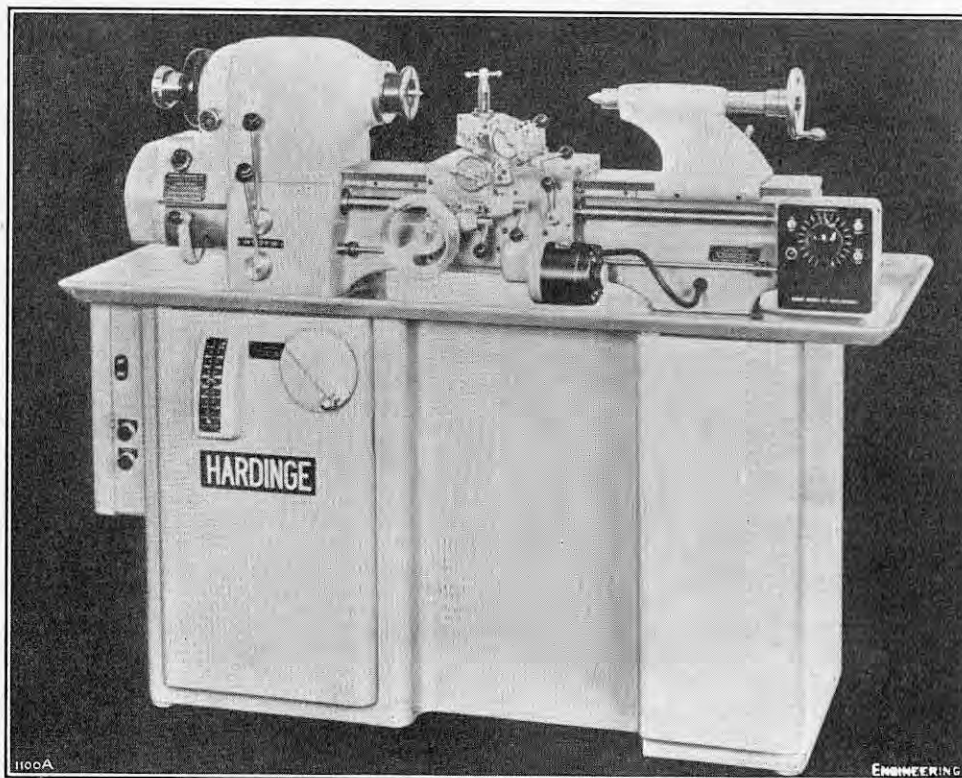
11-IN. SWING CENTRE LATHE; HARDINGE MACHINE TOOLS, LTD.
